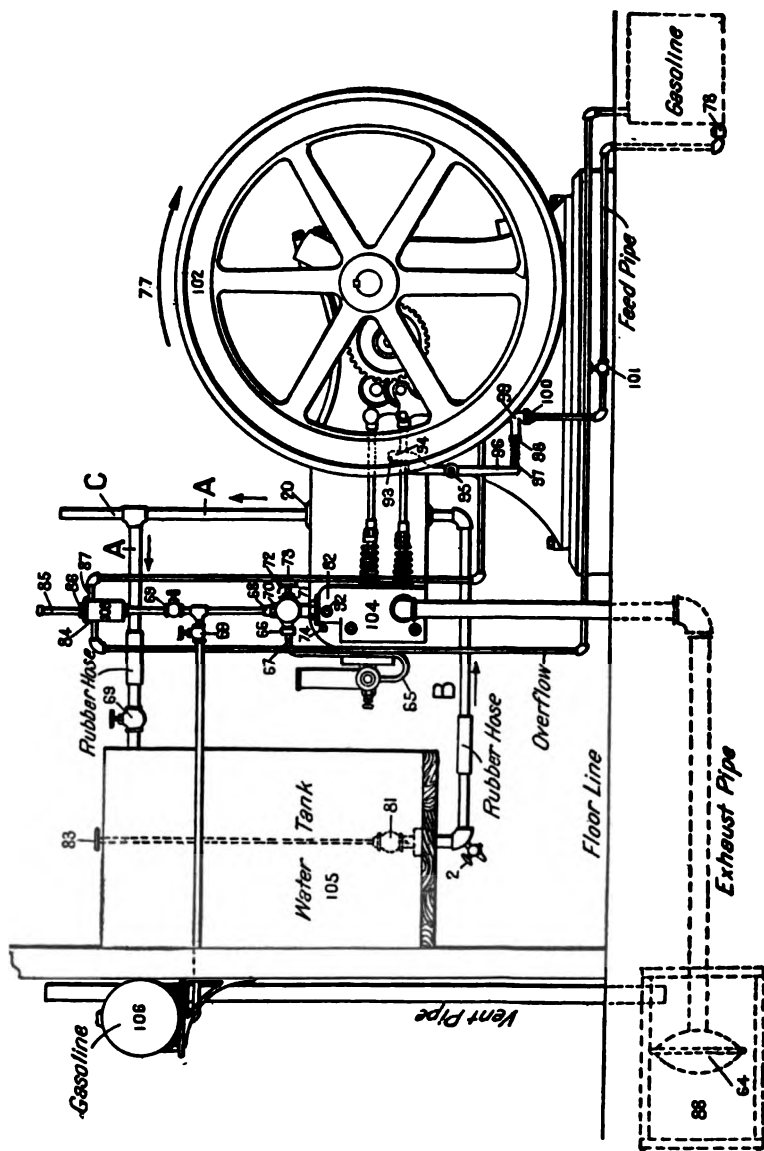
GASOLINE ENGINE INSTALLATION.
